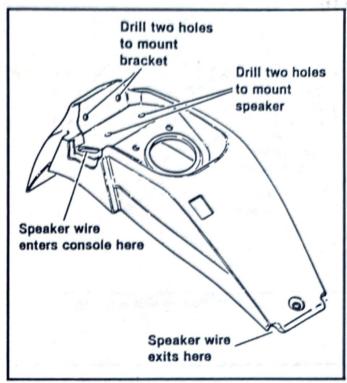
Console Modification for Mounting Motorola Radio Speaker
